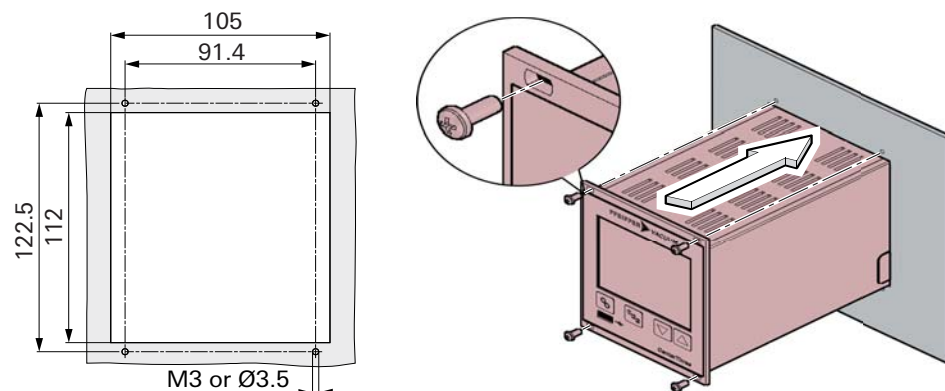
Operator panel cutout and mounting CenterTwo / CenterThree
